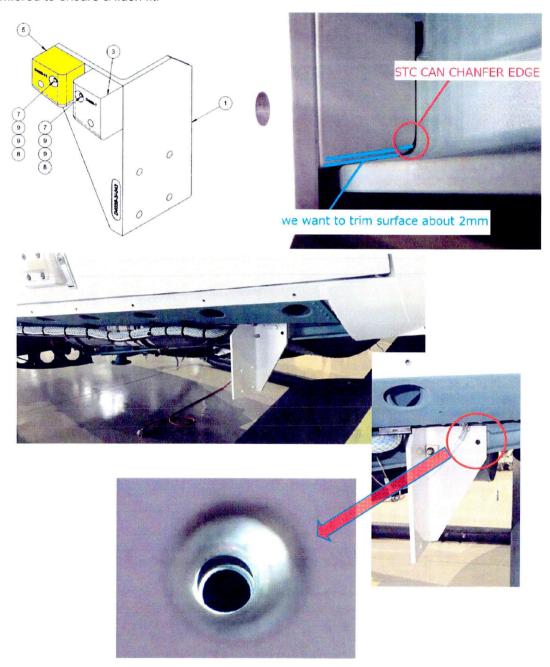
ADJUSTING R/H AFT ANGLE ASSEMBLY
